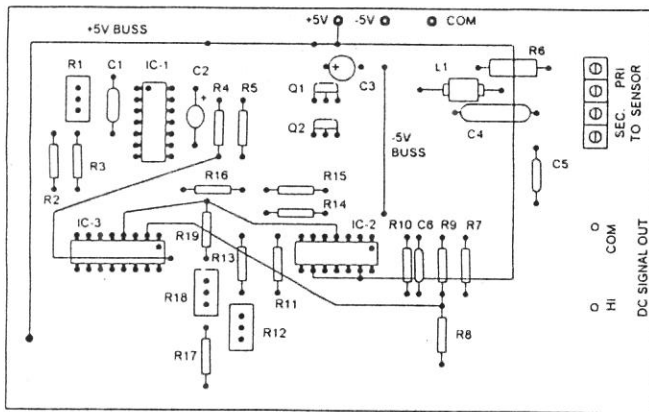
FGM-550 Magnetometer Circuit Board - top view
